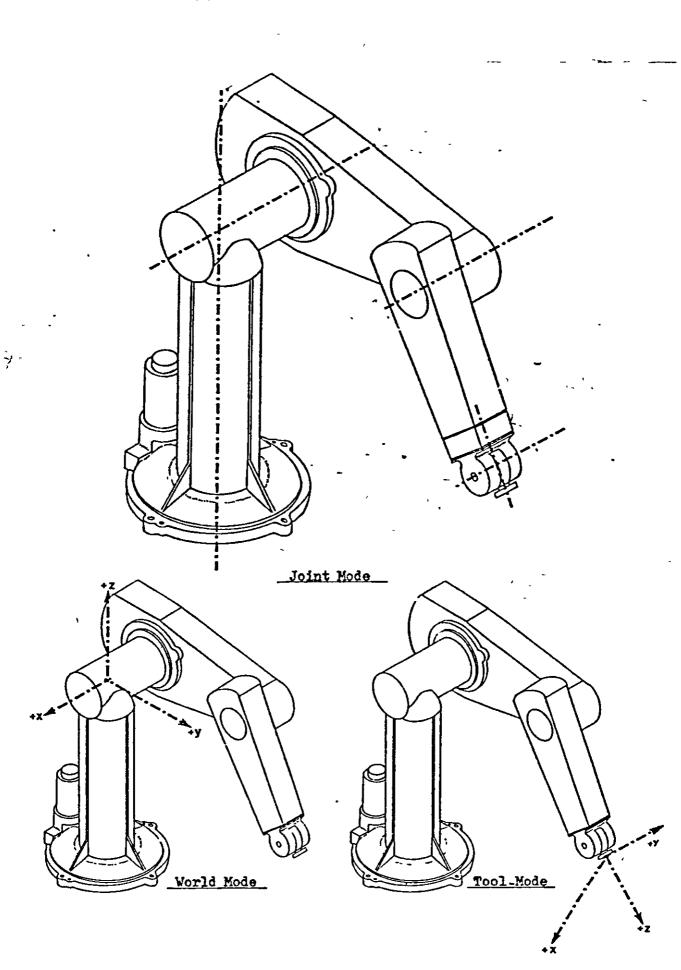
JOINT, TOOL AND WORLD MODES
